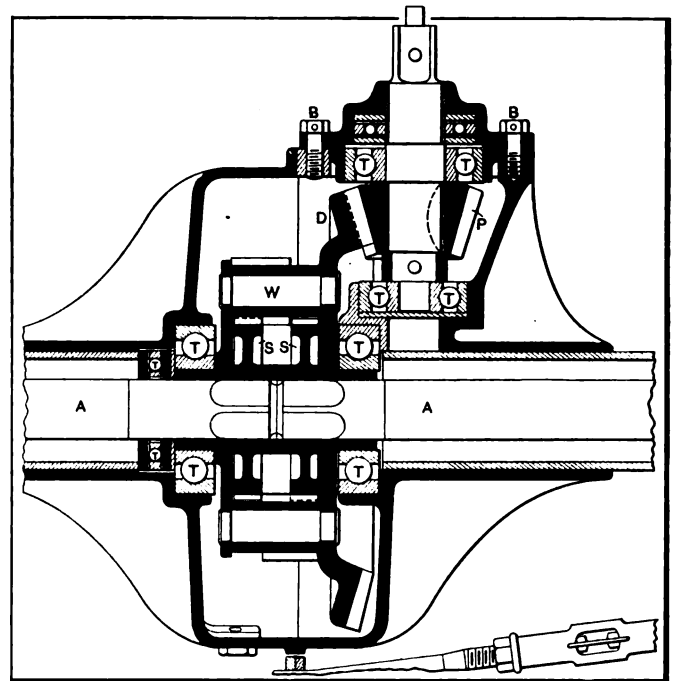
Showing the differential in sectional view. Note positions of ball bearing
